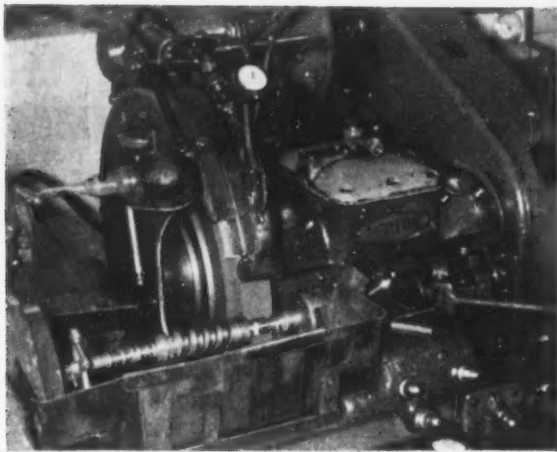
Ends of the cam are ground on this Norton machine. The work piece is shifted end for end between the first and second passes. A stepped wheel is used.
